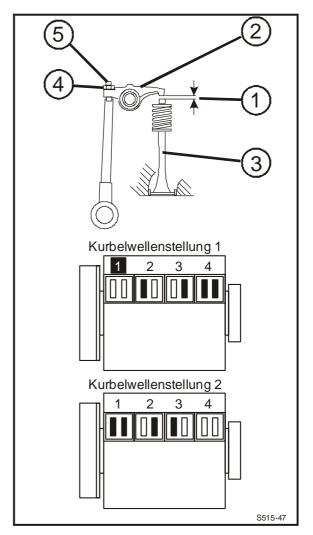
Valve setting Crankshaft position 1 Crankshaft position 2
